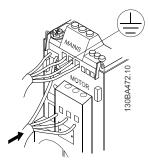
Mounting of Earth Cable, Mains and Motor Wires
